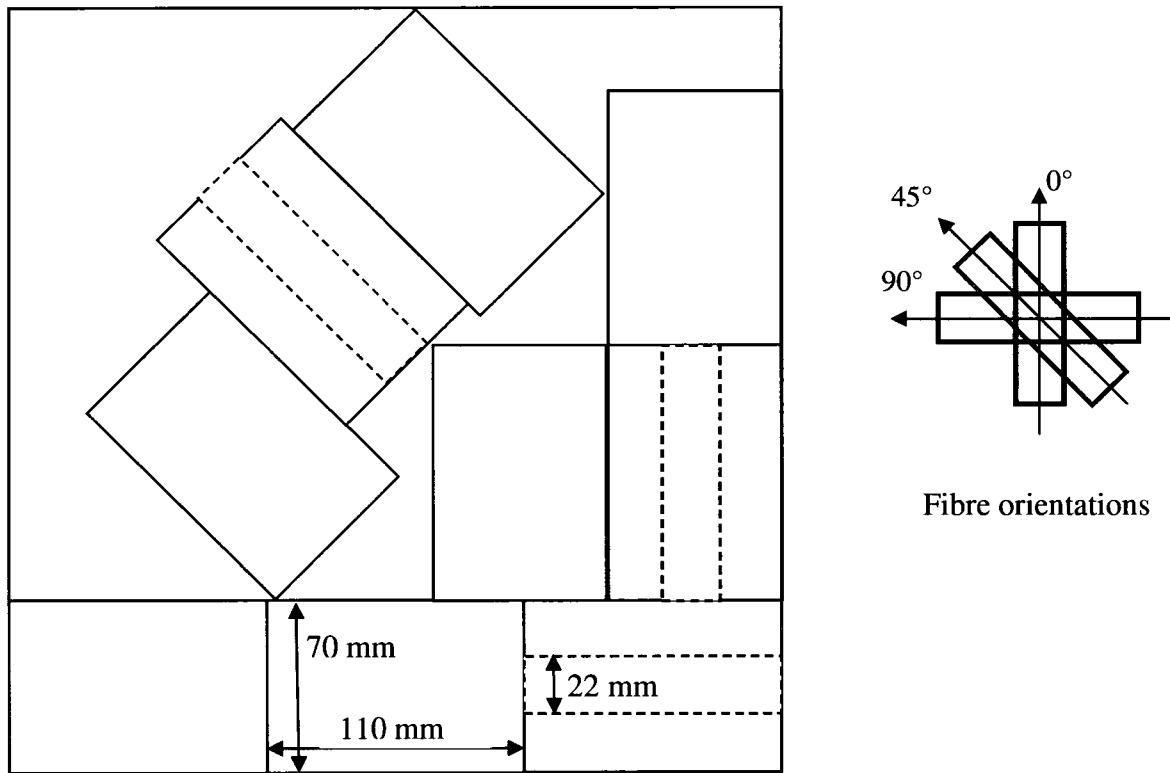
Typical thermal conductivity specimen cut plan with orientations
